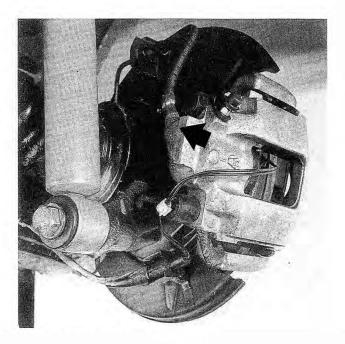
Rear brake caliper brake hose fitting (arrow).
